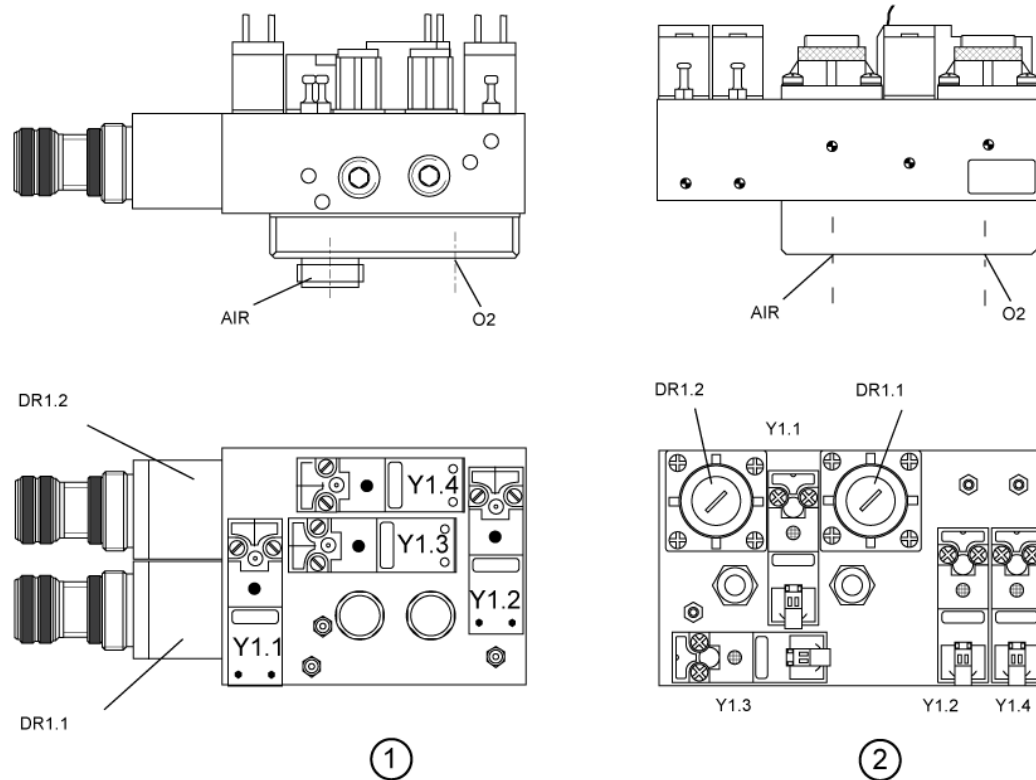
Dräger gas connection block (1) and FAS gas connection block (2)
